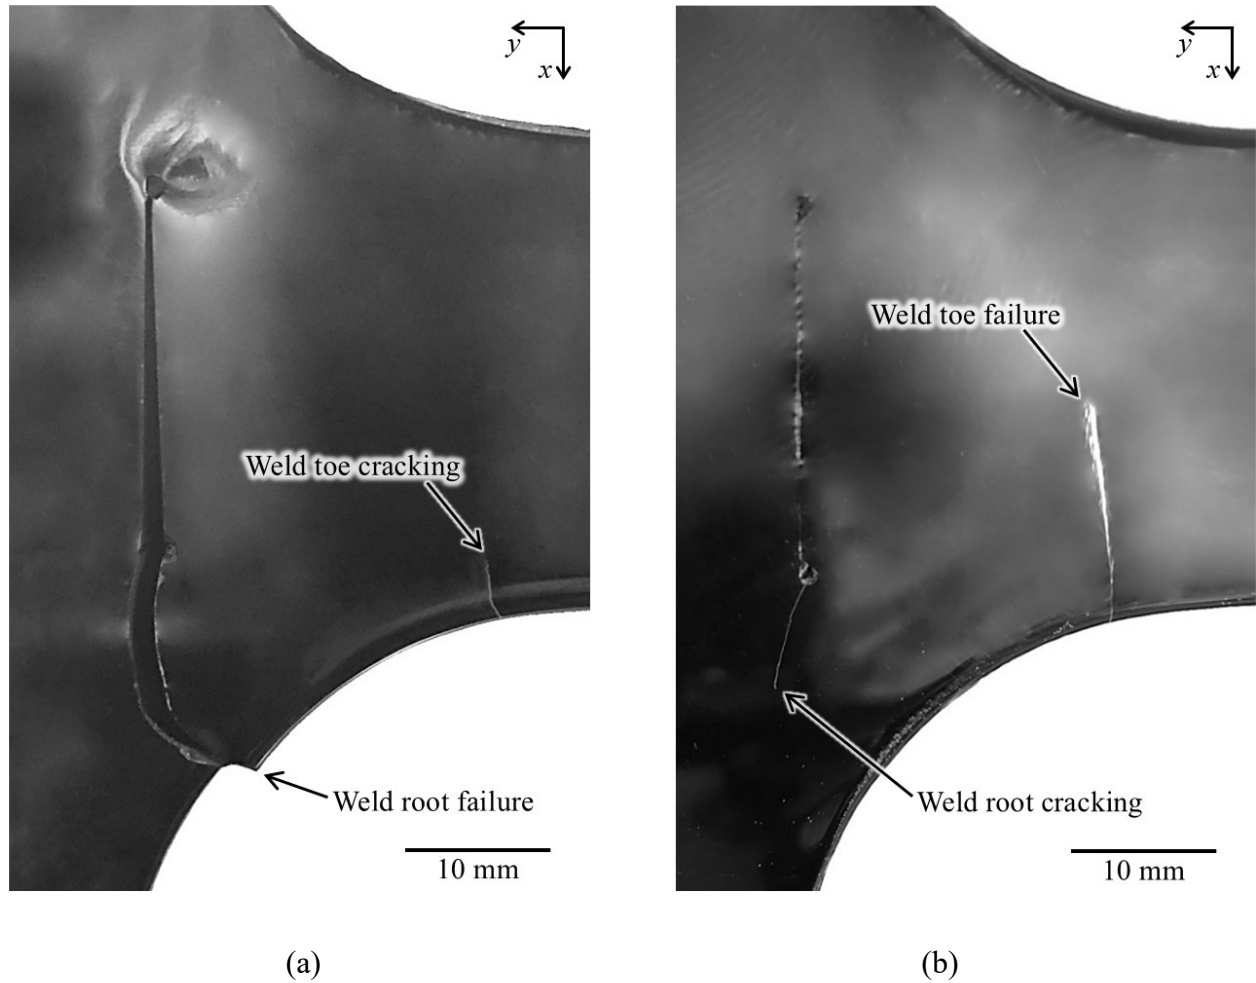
Fatigue failure mode transition observed for T2: (a) final fatigue failure at the weld root crack and (b) final fatigue failure at the weld toe crack
